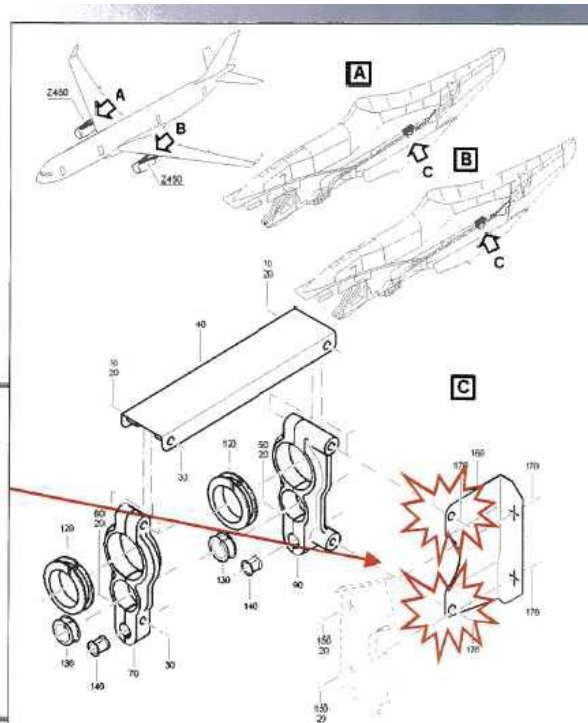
Fatigue fracture at the Hydraulic Line Bracket F29030080
